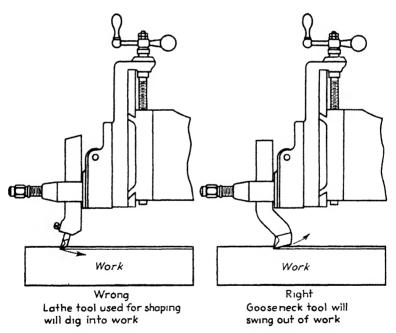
Right and wrong ways of setting tools for shaper or planer work.
